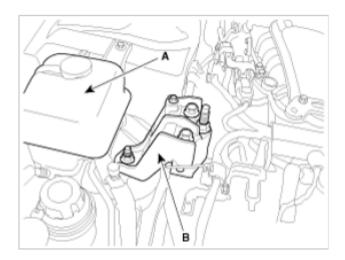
Identifying Engine Coolant Reservoir Tank And Engine Mounting Bracket
